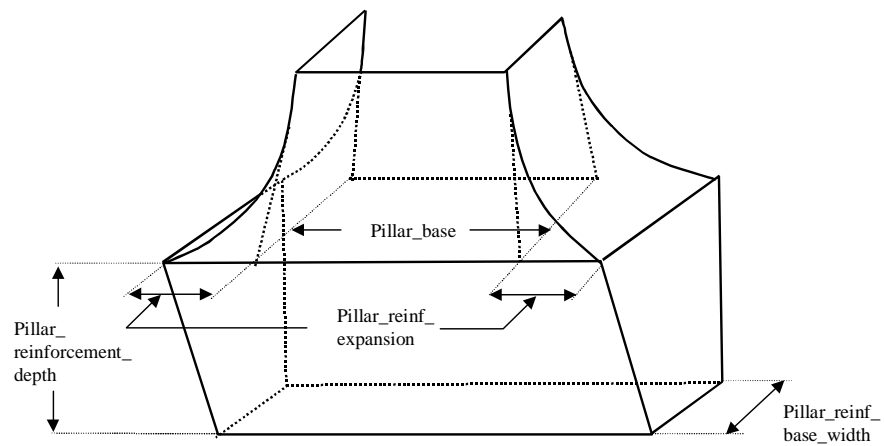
Pillar Reinforcement and Extended Pillar Reinforcement
